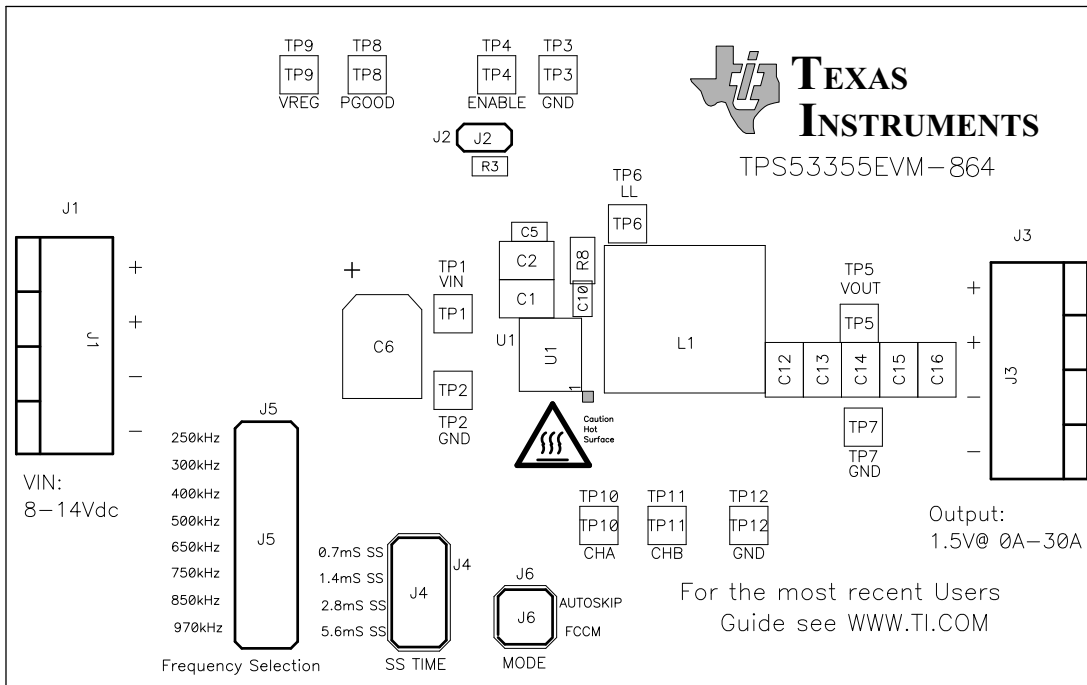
TPS53355EVM-864 Top Layer Assembly Drawing
